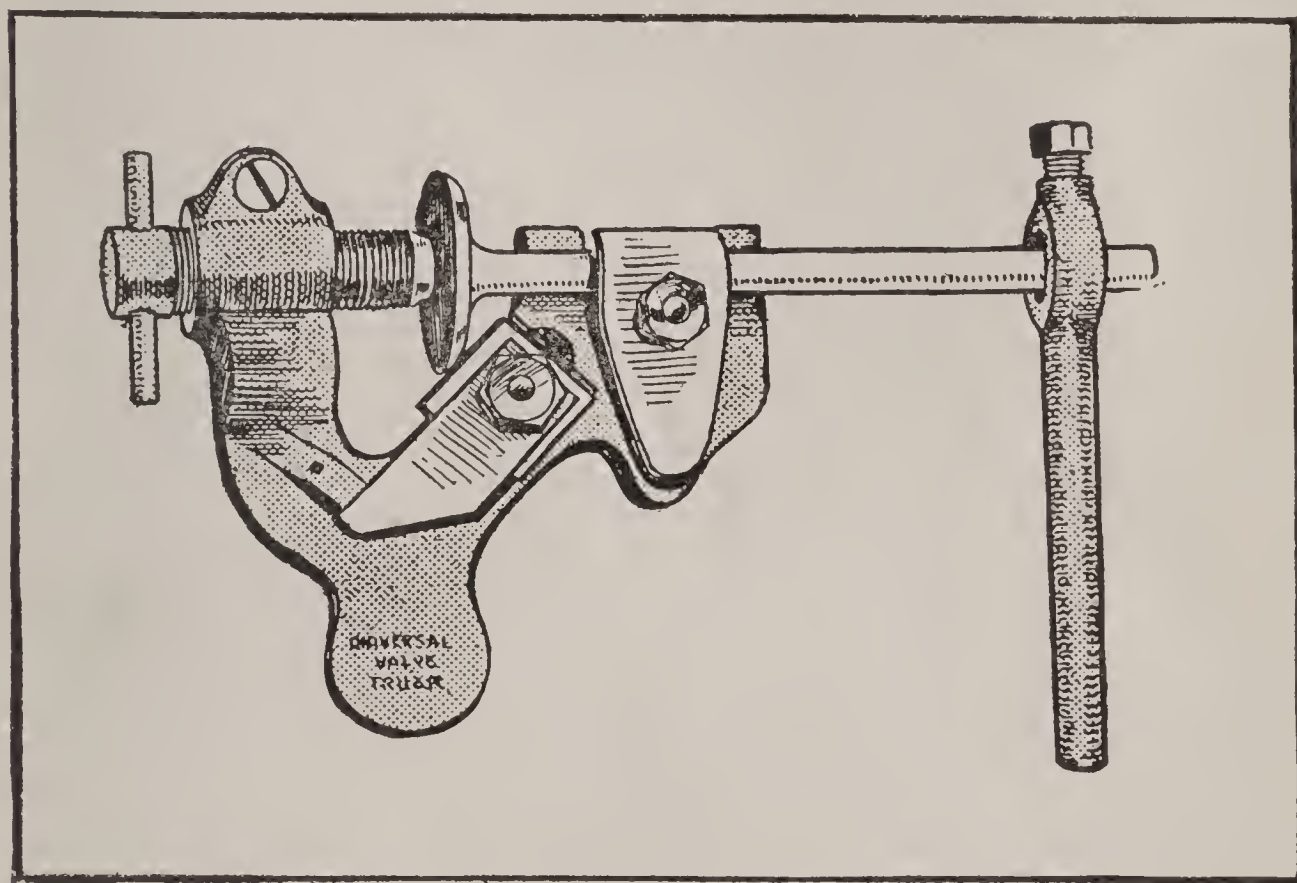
Simple Tool Used in Refacing Valve Seat.
